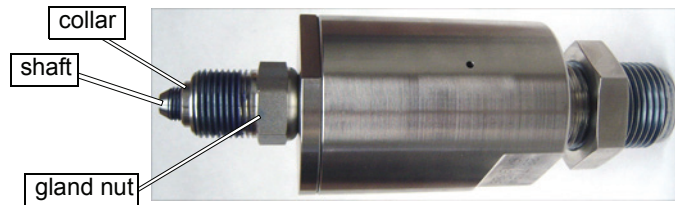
Swivel Assembly with Collar, Collet, and Gland Nut on Shaft
